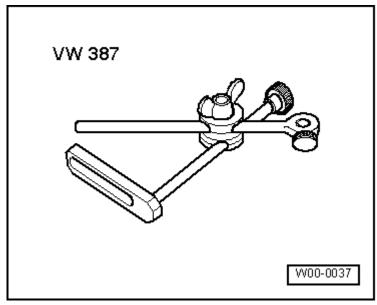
Dial Gauge Holder VW 387 Courtesy of AUDI OF AMERICA, LLC
